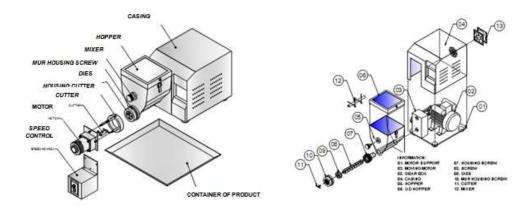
3D Images and Isometric Paste Extruder Machines after Re-Design
